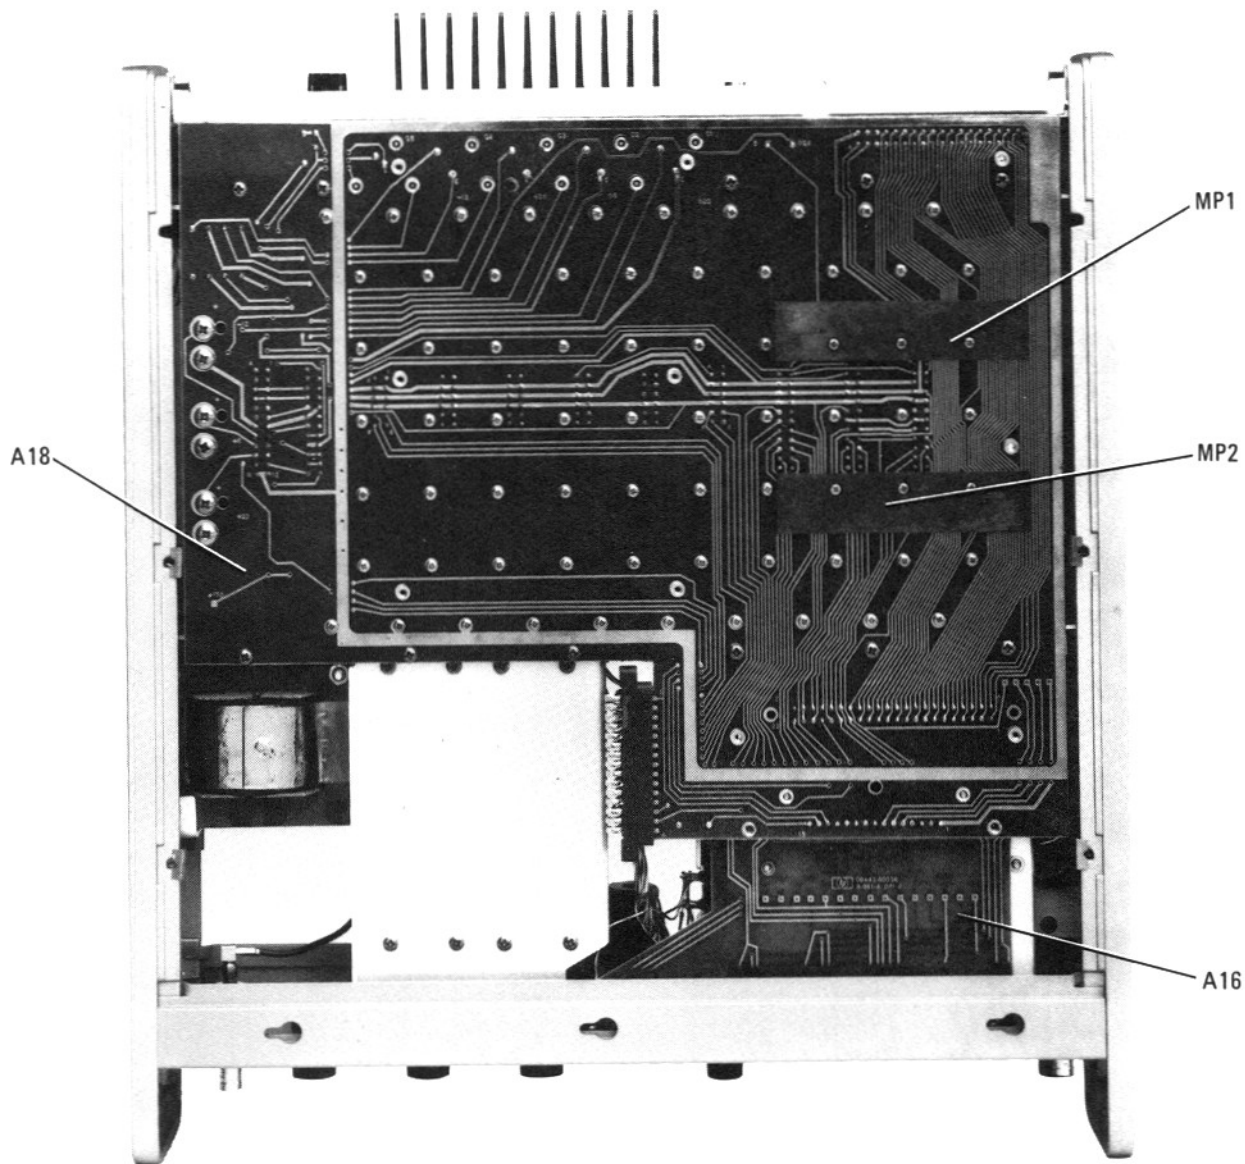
Major Assemblies and Chassis-Mounted Parts Locations
